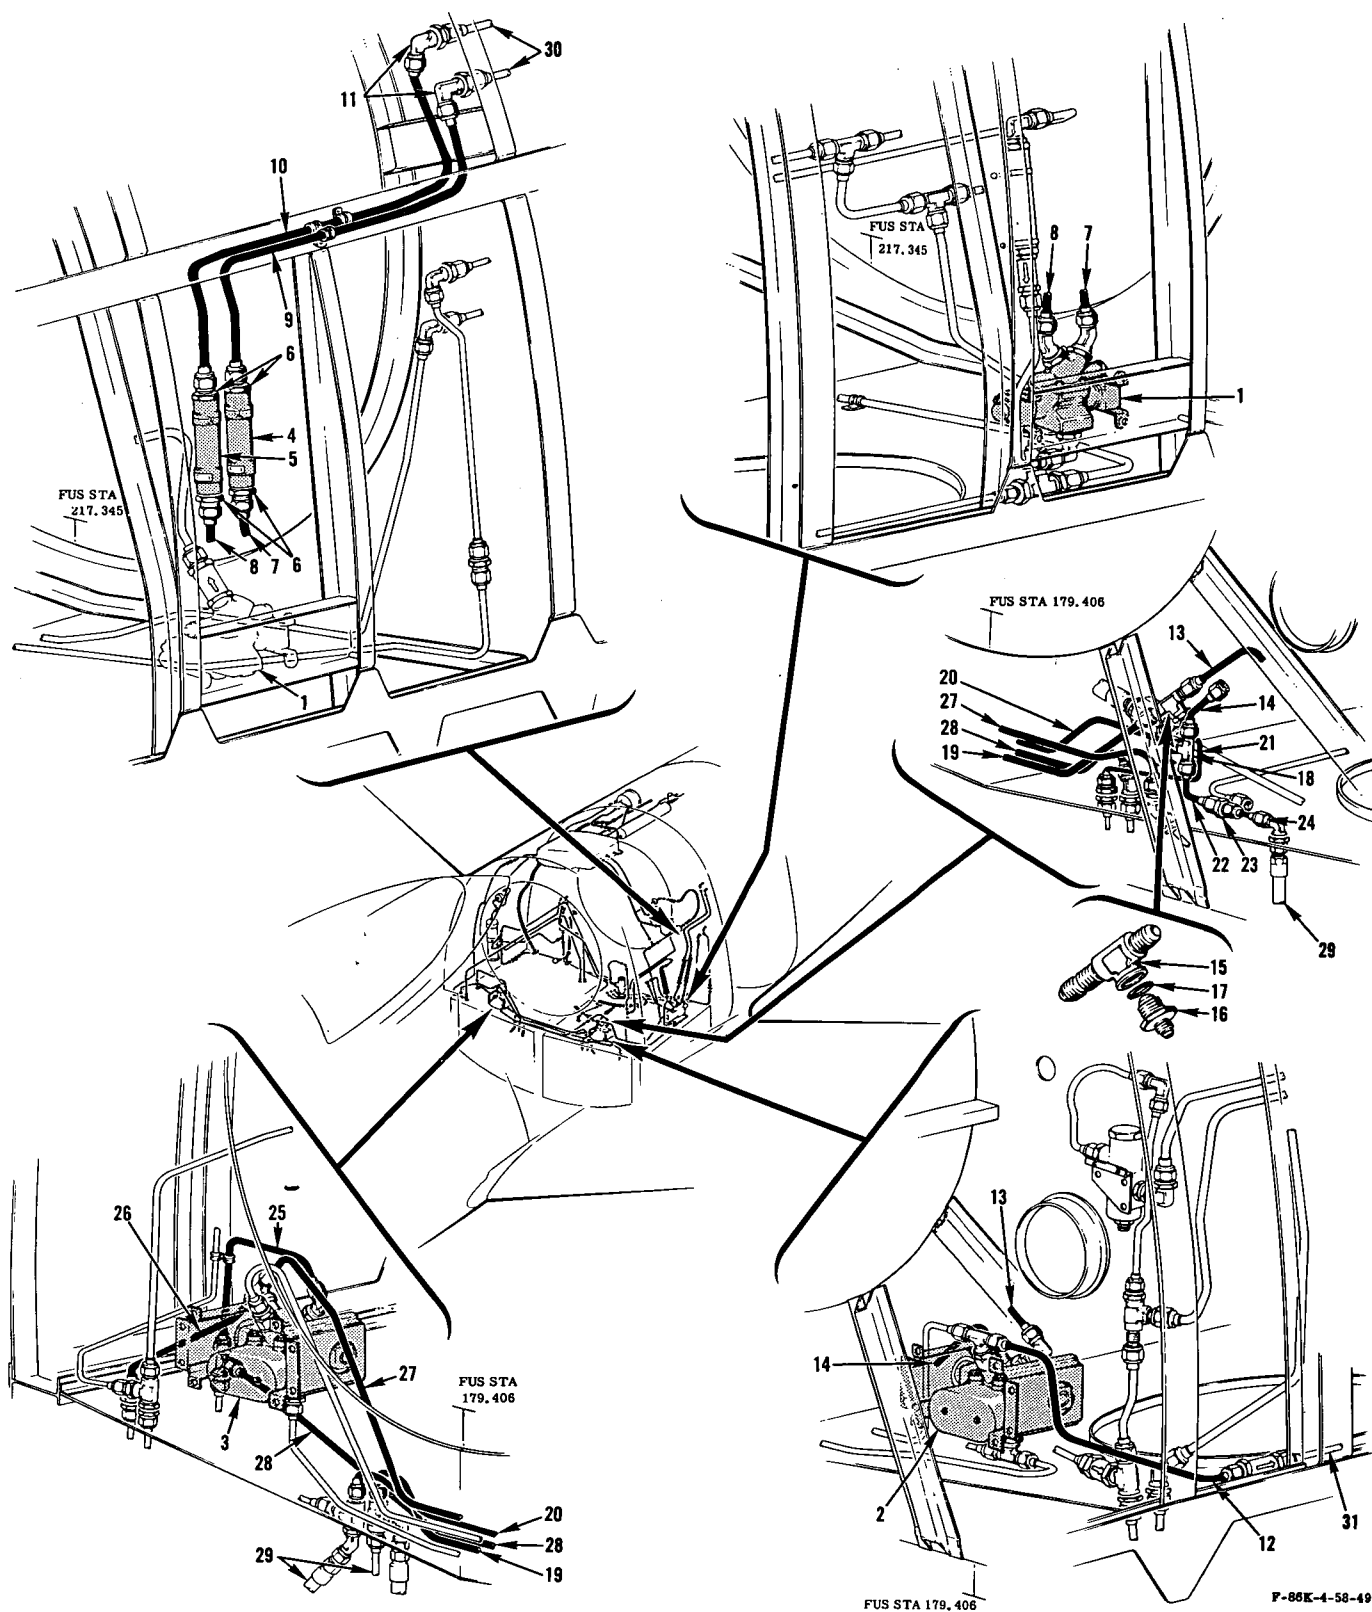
FUSELAGE STATION 179 TO 217 FAIRING DOOR DIVE BRAKE AND ALIGHTING GEAR HYDRAULIC EQUIPMENT
